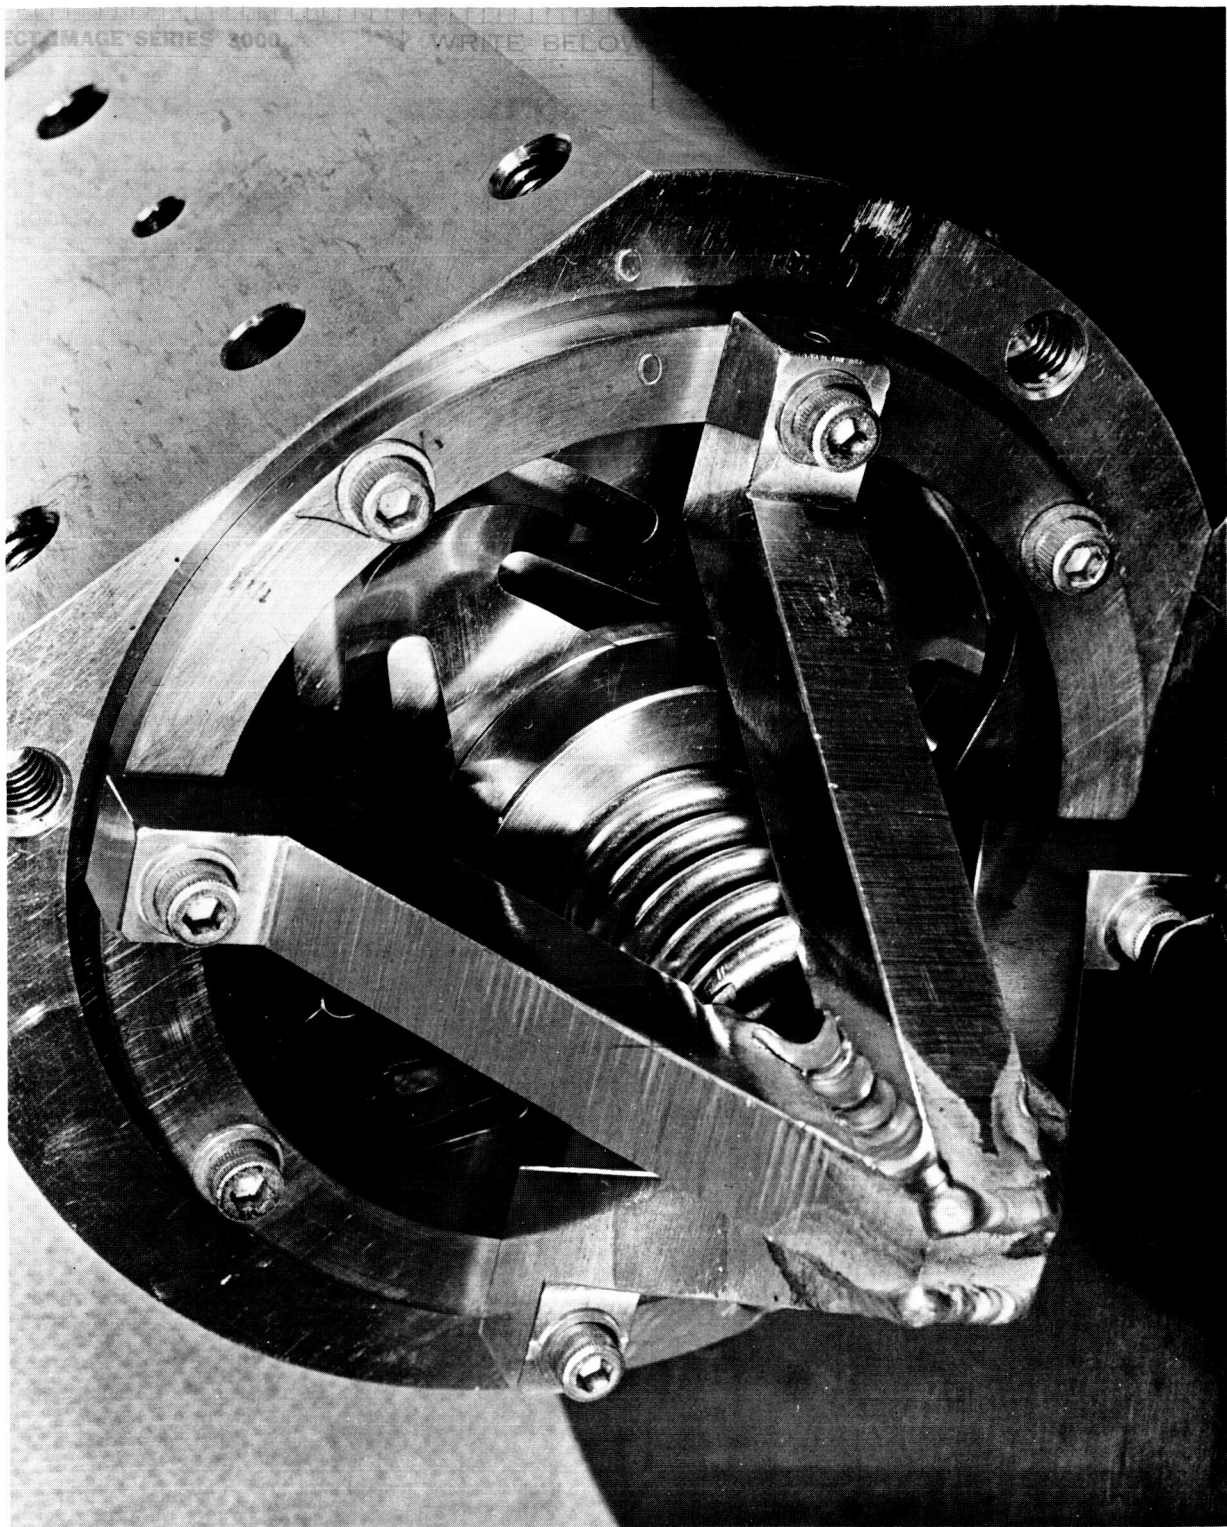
Solenoid Diaphragm in Vibration Test Fixture.
